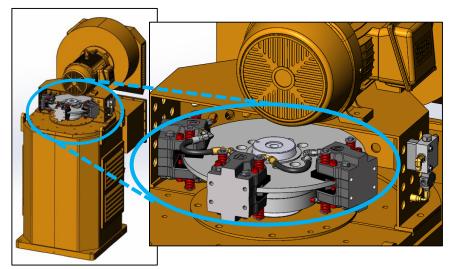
View of brake calipers and disc brake, and pilot-operated check valve of the ESI main motor
